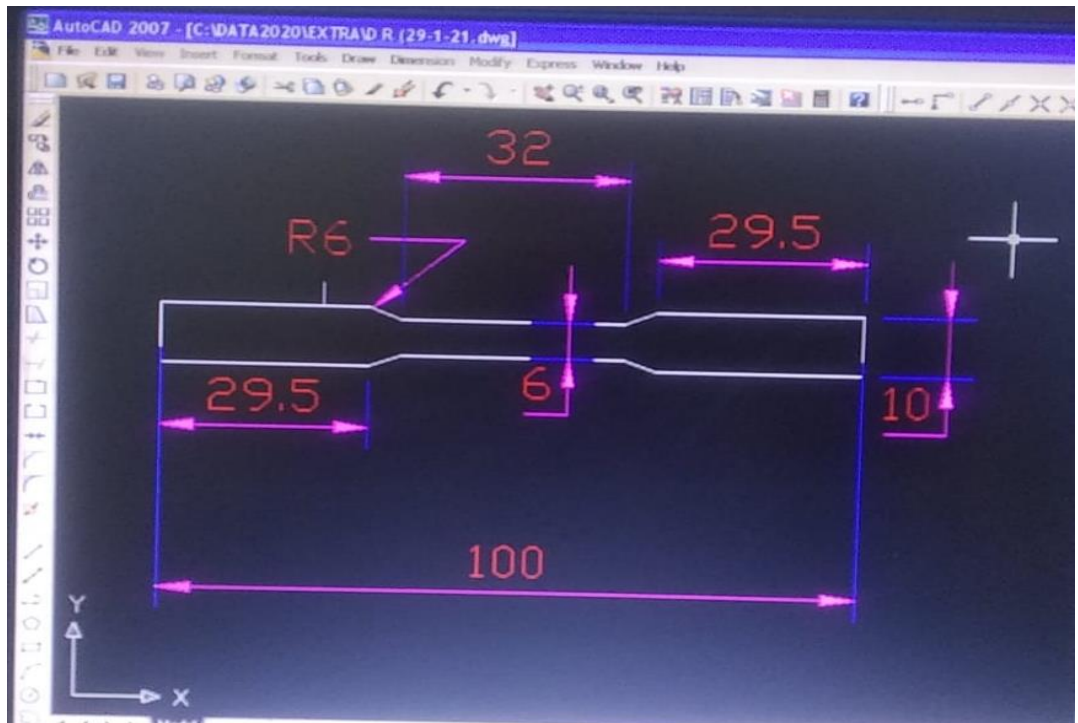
CNC Wire Cutting Programming Sub Sam pal as Per Tensile testing Specimen as per ASTM stander
